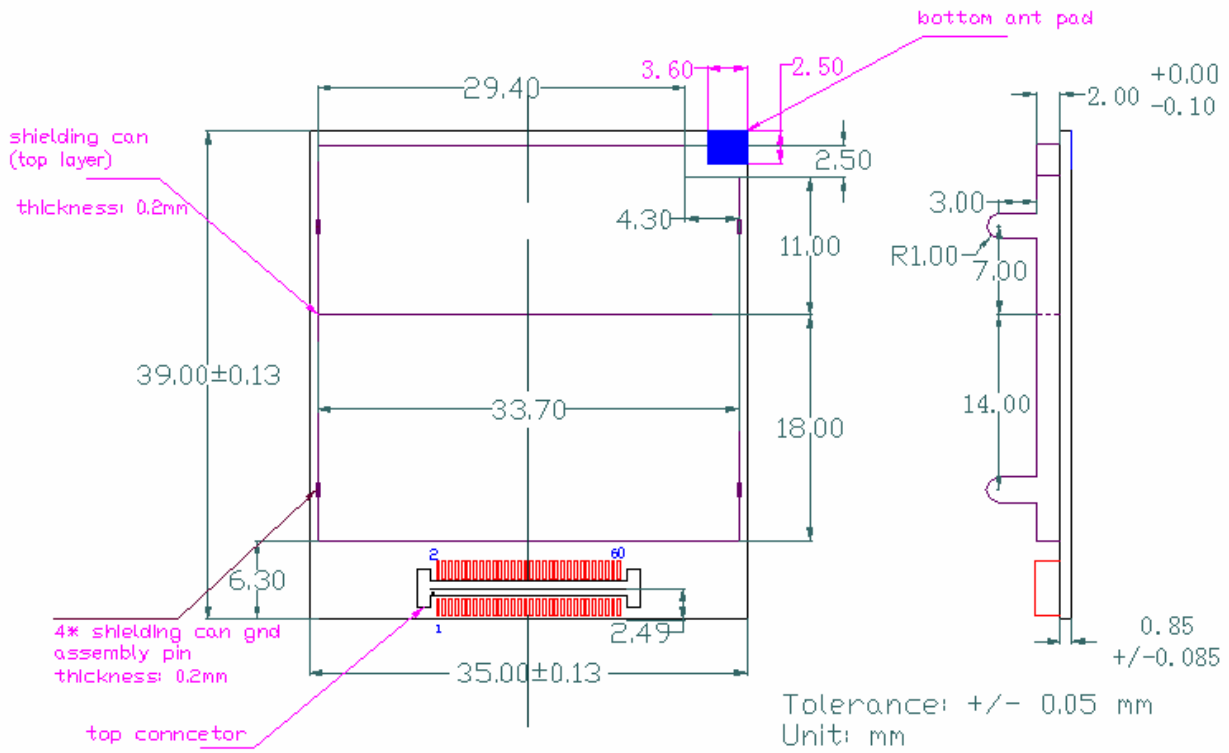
SM5210 Module Outline Drawing (Bottom View/ Side View)
